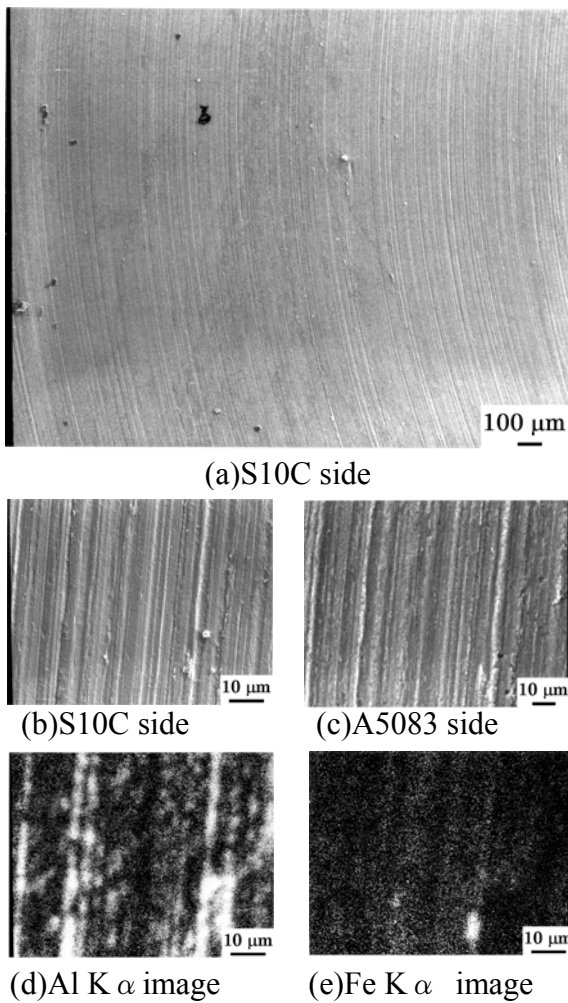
Fractured surfaces of a A5083/S10C joint ( $t_1=1$  s): (a) fractured surface of the steel side, (b) fractured surface of the steel side observed at a higher magnification, (c) fractured surface conjugate to (b), (d) distribution of Al analyzed by EDX in the area shown in (b), and (e) distribution of Fe analyzed by EDX in the area shown in (c).
